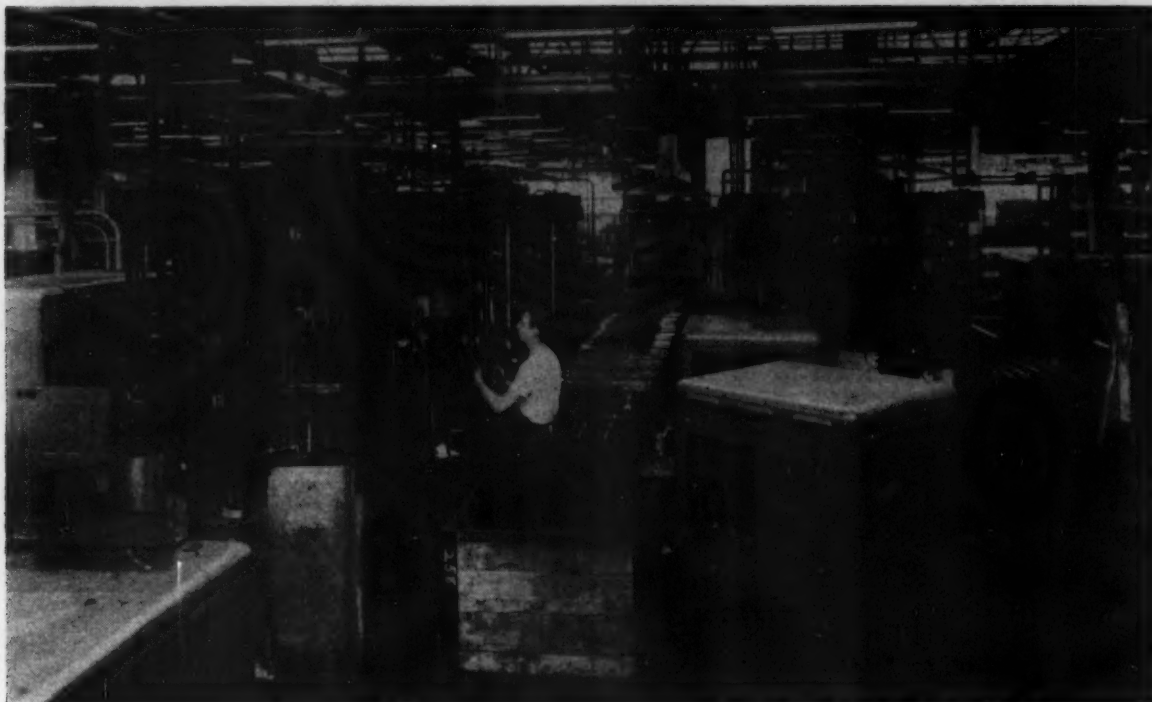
Layout of the equipment for induction hardening axle shafts at the Salisbury plant, showing the Snyder machine (facing operator) and the Tocco units.
